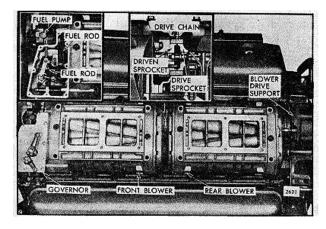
Typical Blower Mounting (Tandem Blower 12V Engine)
